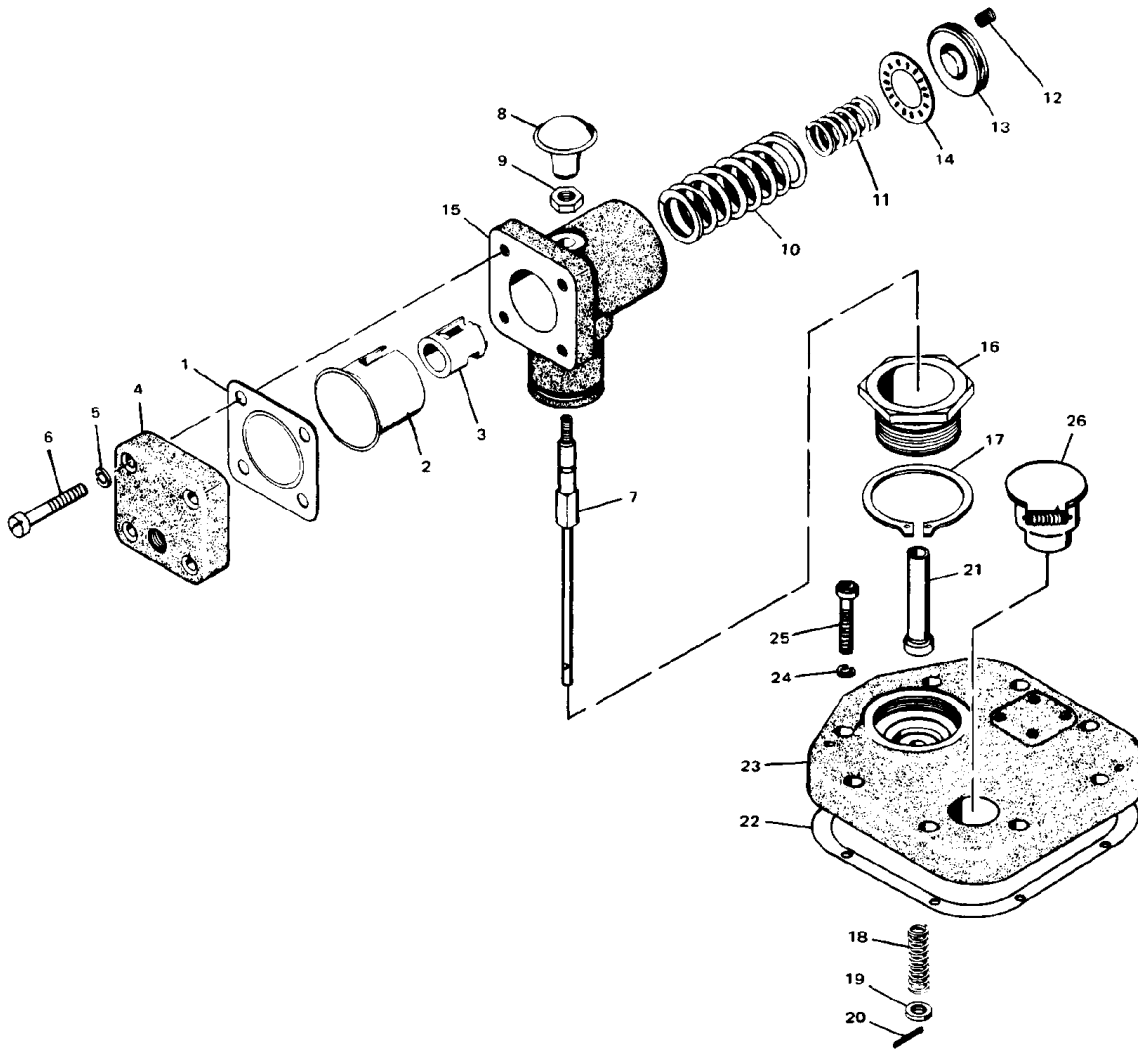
Exploded View of 12 to 26 psi Lube Oil Shutdown
